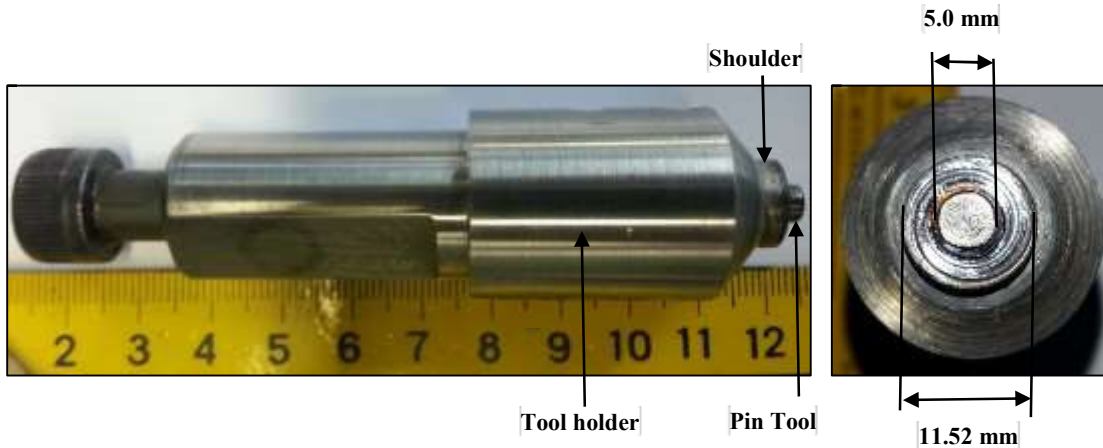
Scrolled Type Shoulder Used in Experimental Work (All Dimensions in mm)
